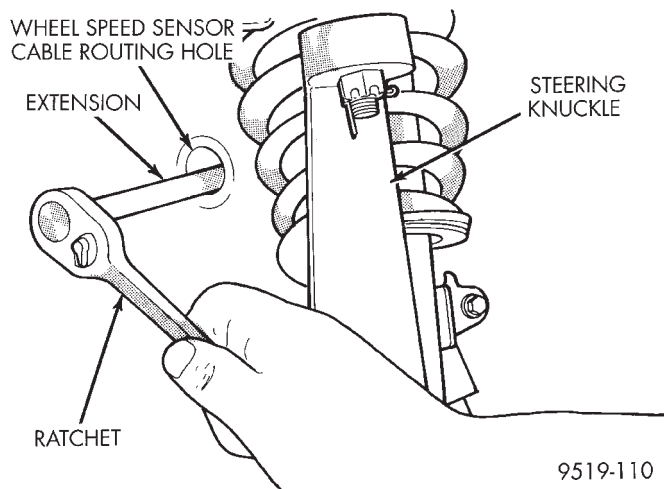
Access To Top Mounting Bolt For Power Steering Pump
